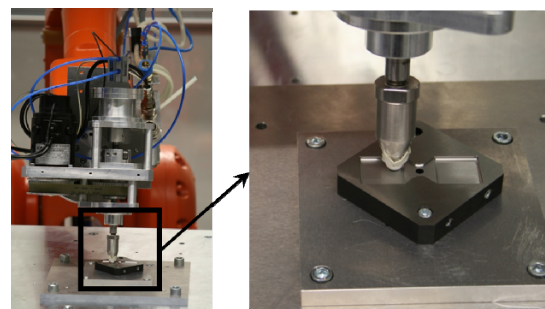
left: Industrial robot with polishing head, right: Tool with soft cloth [12]
